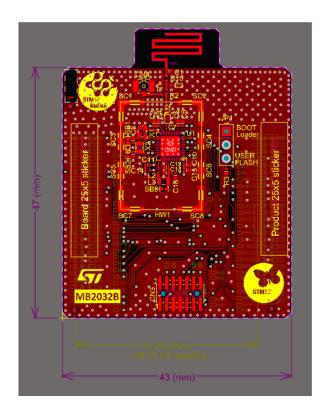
NUCLEO-WB09KE mechanical dimensions (in millimeters)
